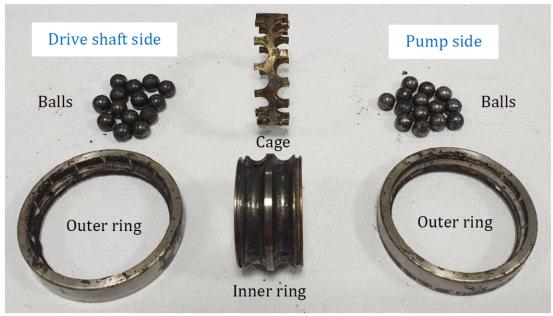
A view of the incident pulley bearing subcomponents. (Image courtesy of Airbus Helicopters)
